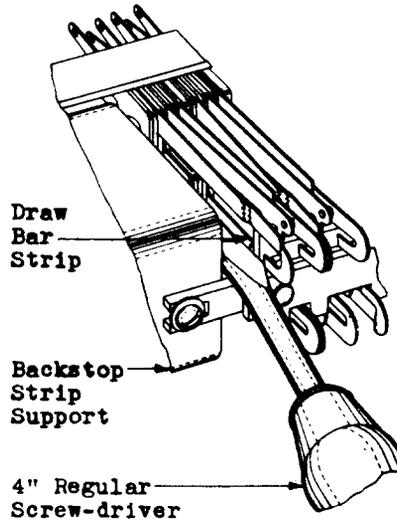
Method of Relieving Draw Bar Link of Spring Load
